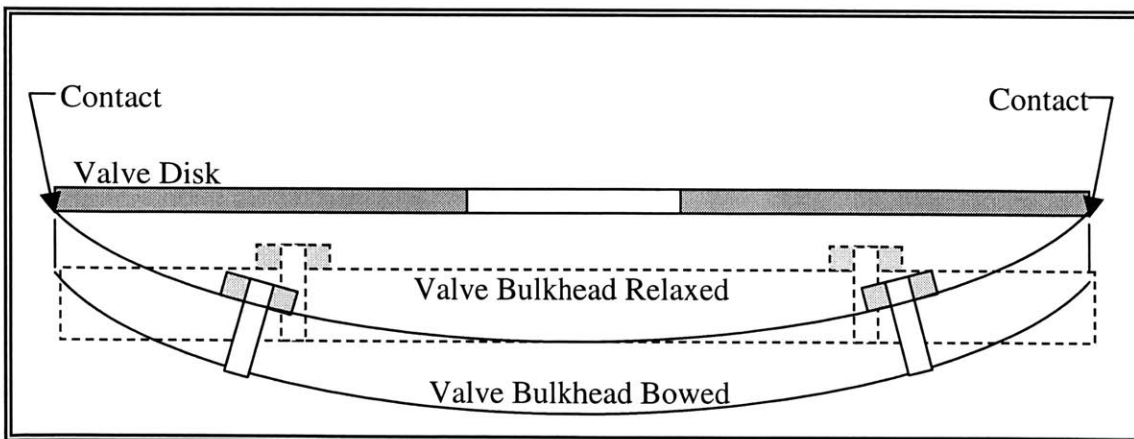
Bowing center downwards, the valve bulkhead pulls the inlet valve ports away from the valve disk, causing it to rest instead on the edge of the outer radius
